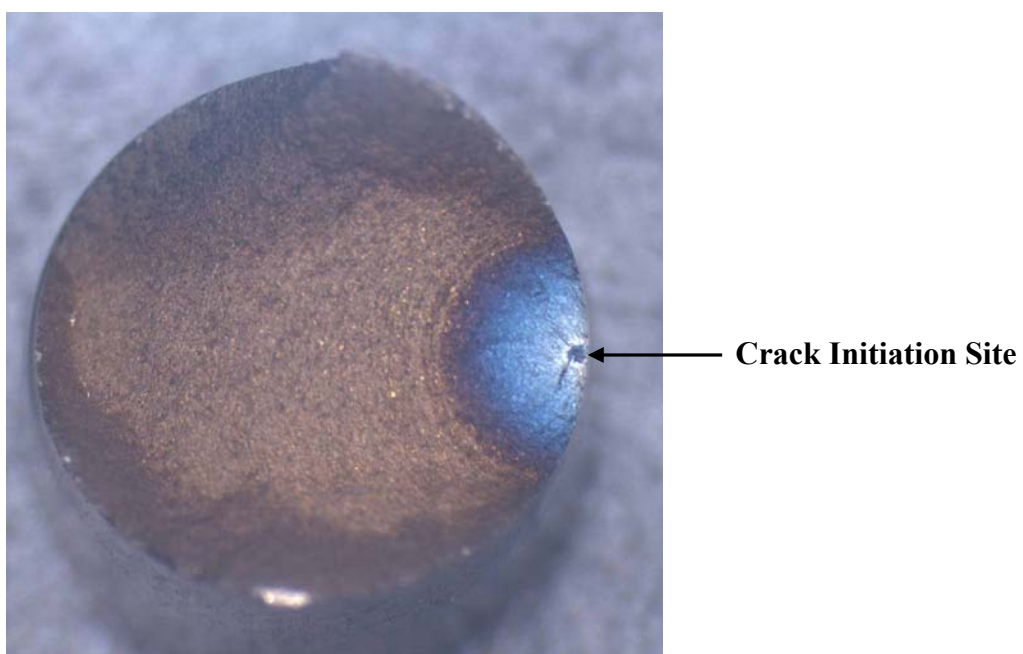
Low magnification image of the fracture surface of specimen UD1-S14 tested at 1050 MPa and 650°C.
